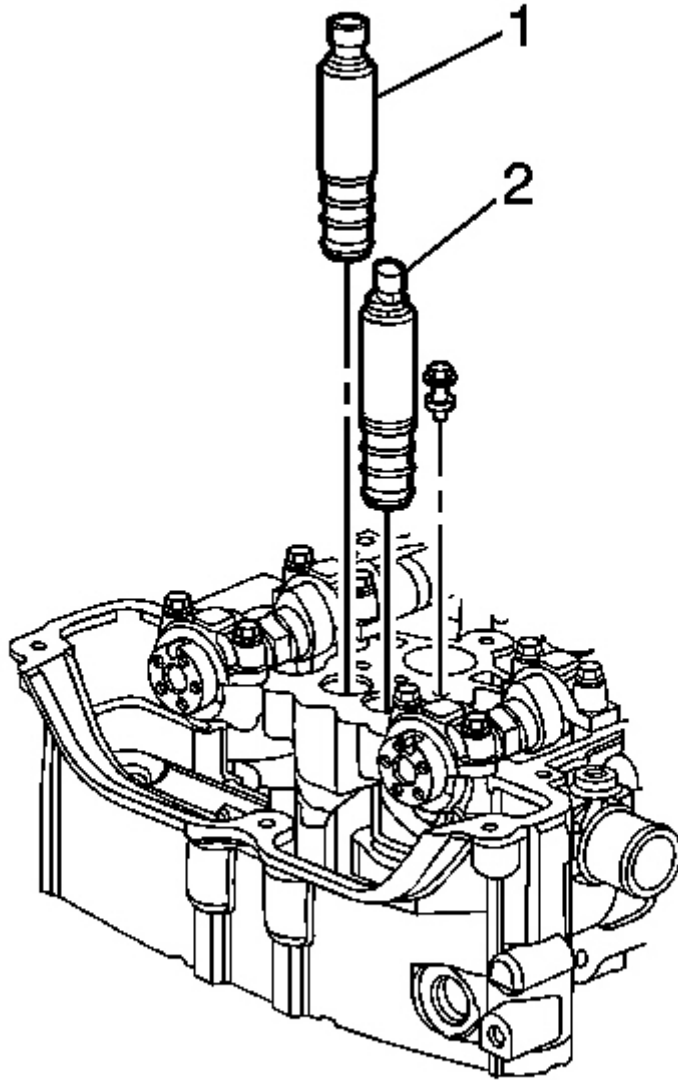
View Of Intake & Exhaust Camshaft Position Actuators
